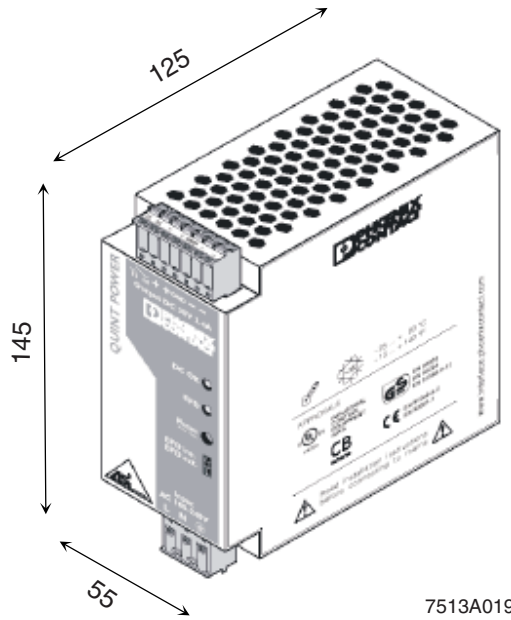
Housing dimensions of the ASI QUINT 100-240/2.4 A EFD power supply unit in mm
